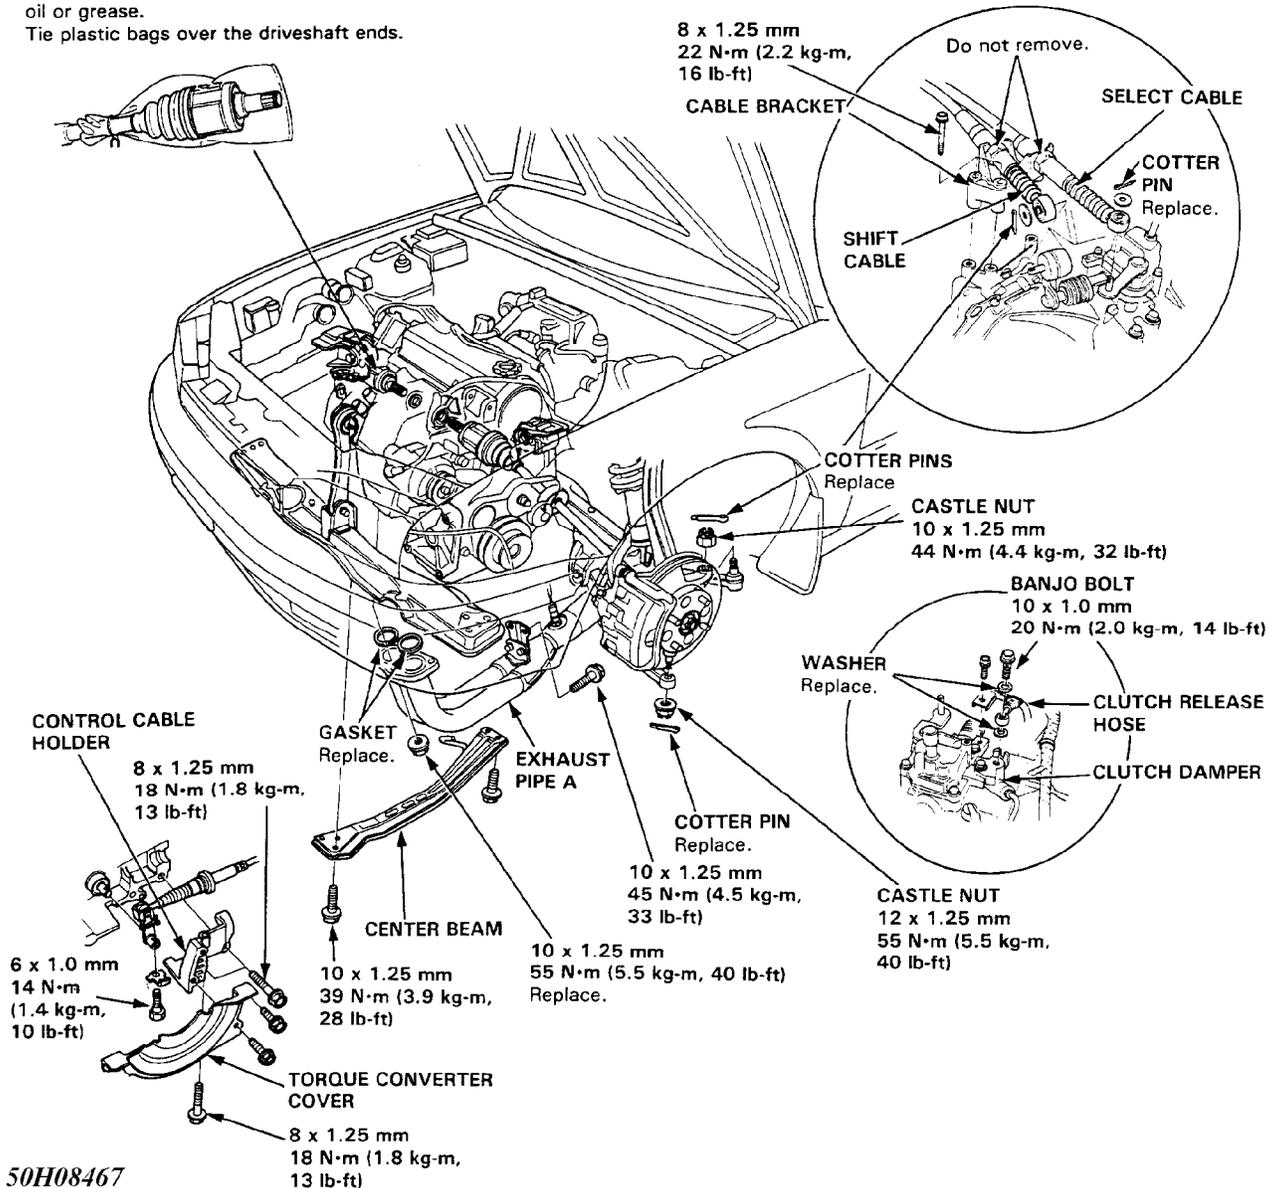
Removing & Installing Engine Assembly (1 of 2)
